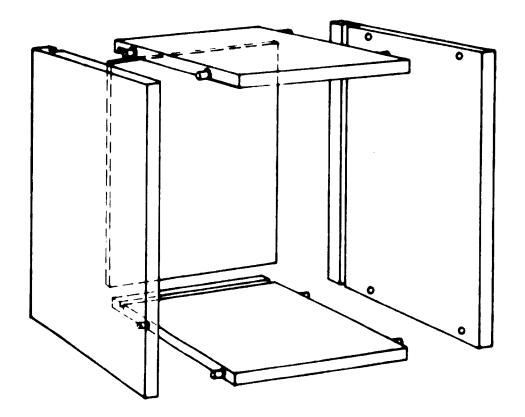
Layouts for assembly of furniture units with unfinished panels
